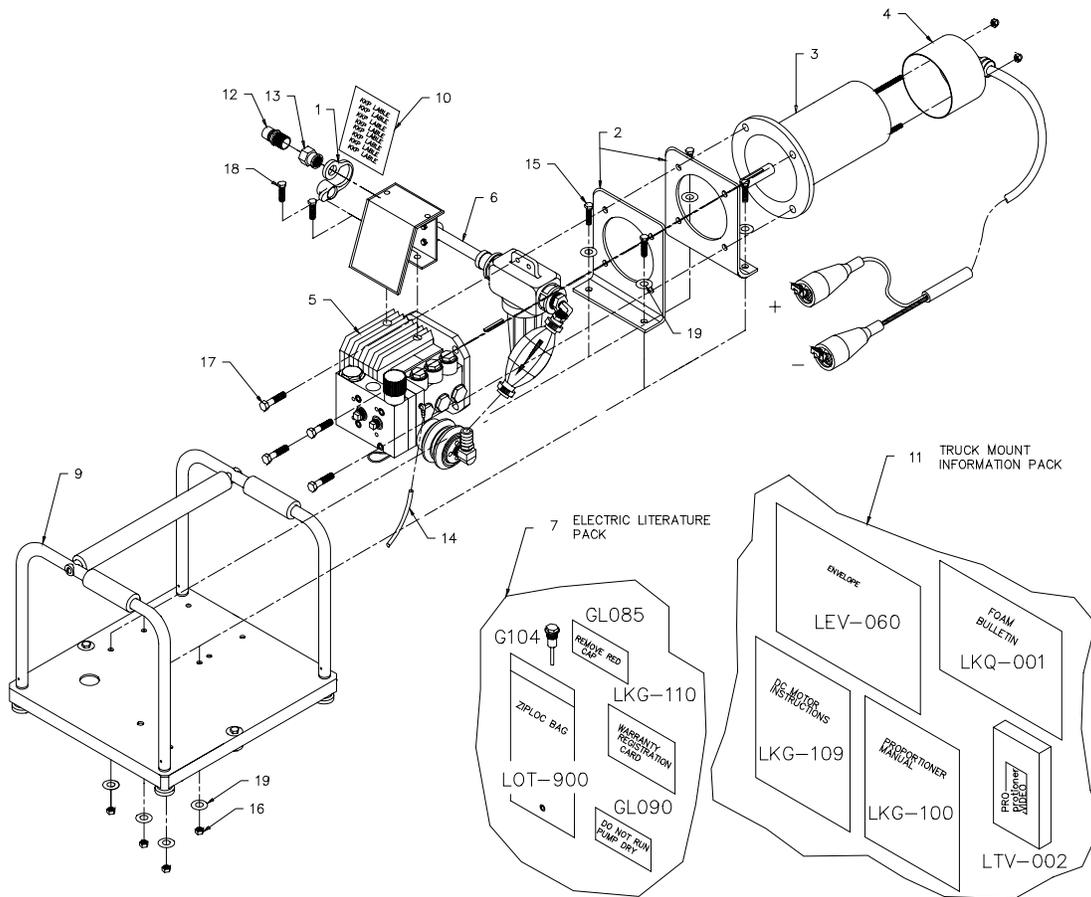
REMOTE ELECTRIC SUBASSEMBLY
